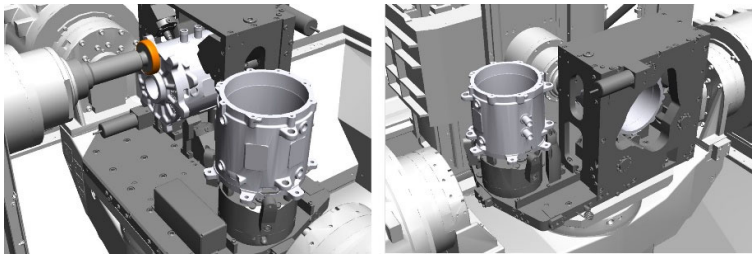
Machining of a stator housing on the SPECHT 600 A/B machining center in three process steps with emulsion and HSK 100 tool interface.
